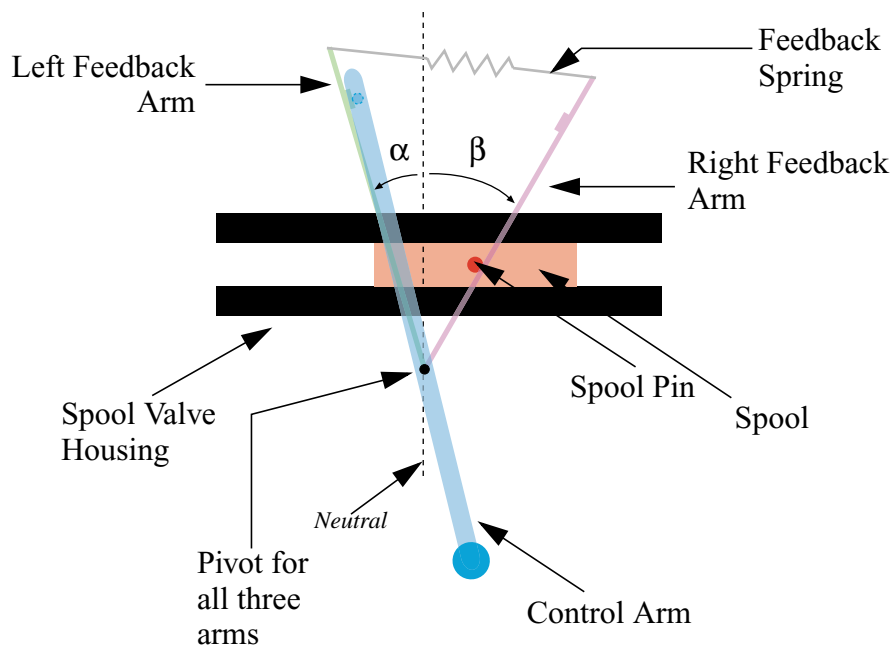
EL Control Module Spool Valve Assembly with Component Description
